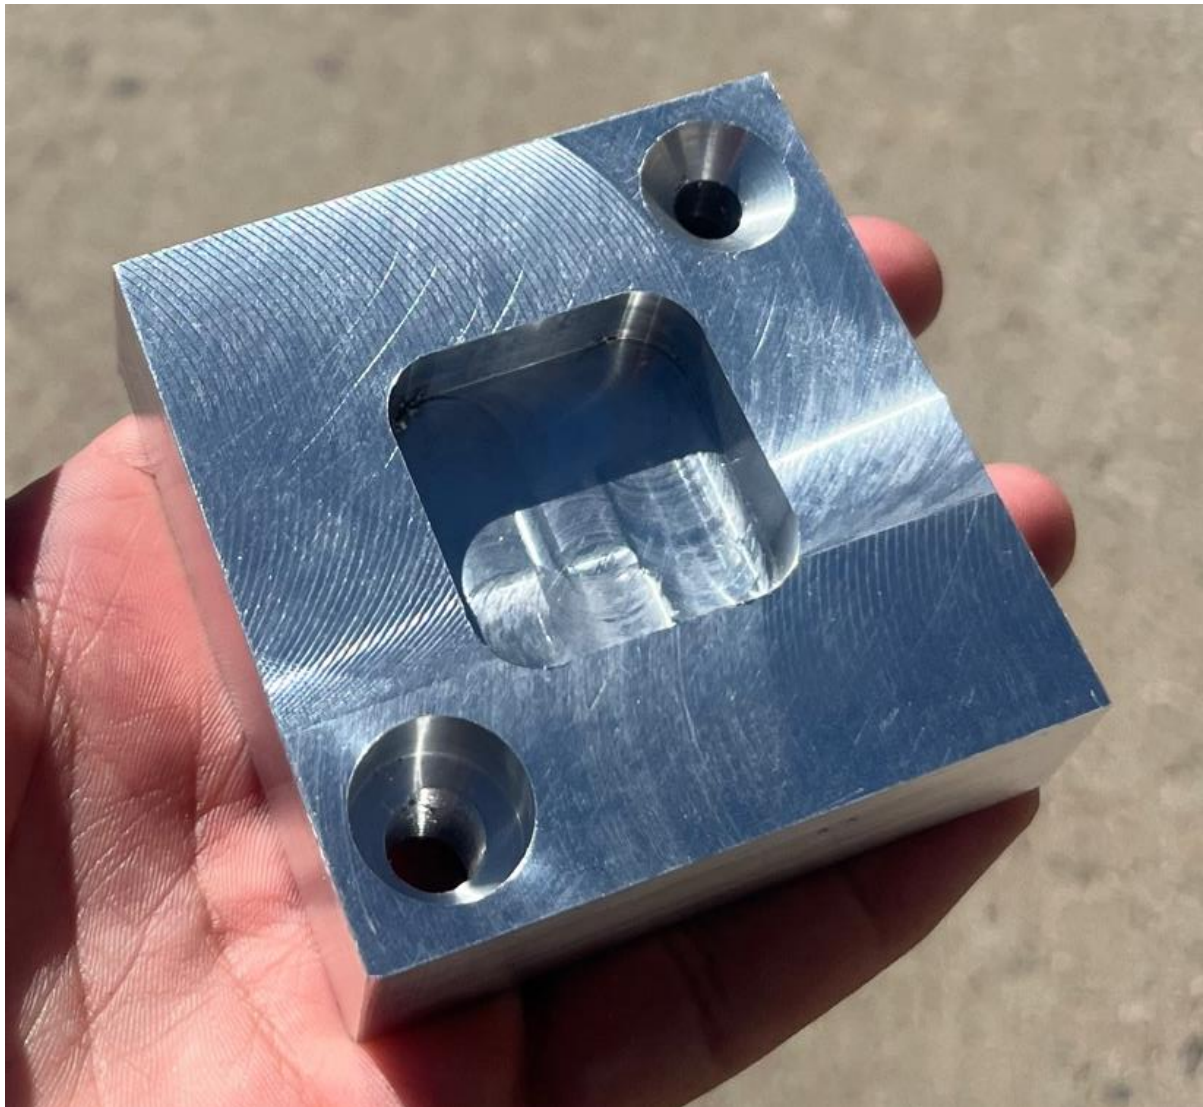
Aluminum piece with a countersink screw hole, a counterbore screw hole, and removed material from the center of the piece
